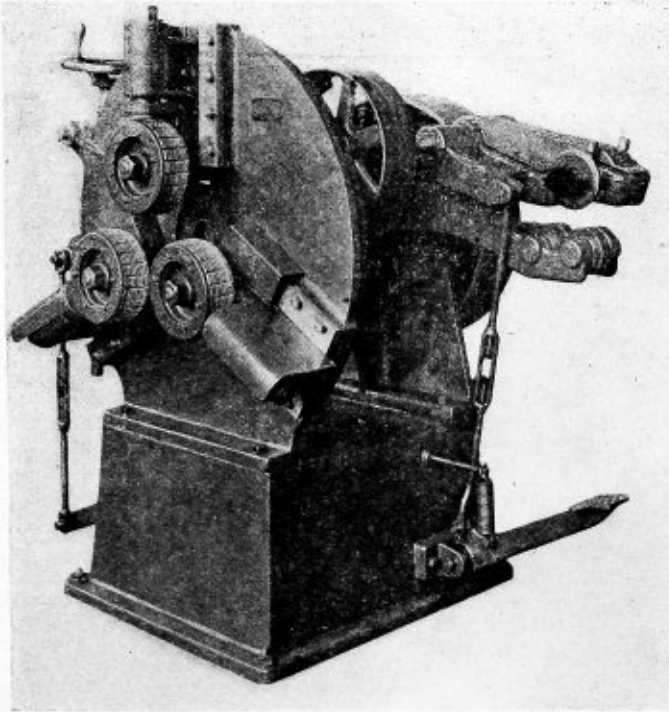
Rotary Single Tube Cleaner for Standard Size and Superheater Tubes
